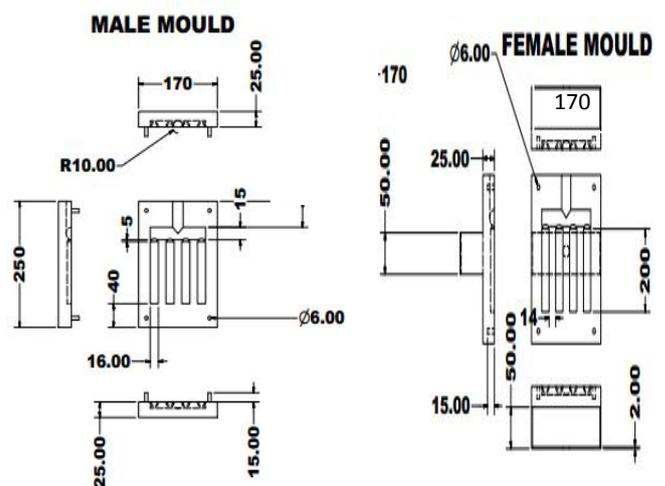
Male and Female Moulds for Permanent Cast Mould.
